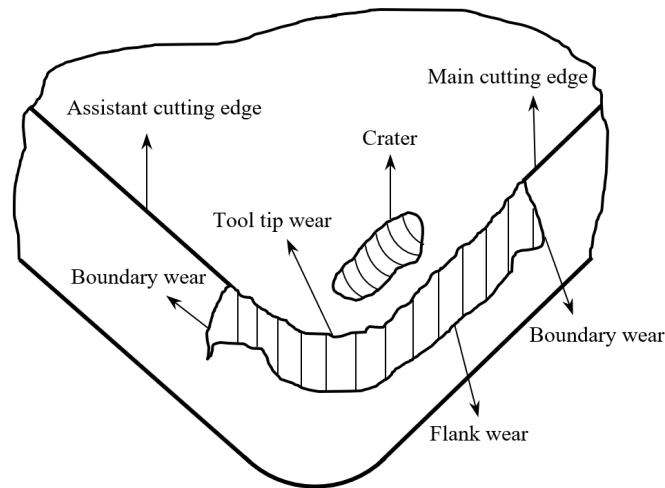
Layout of tool wear (Yan *et al.*, 2009)
